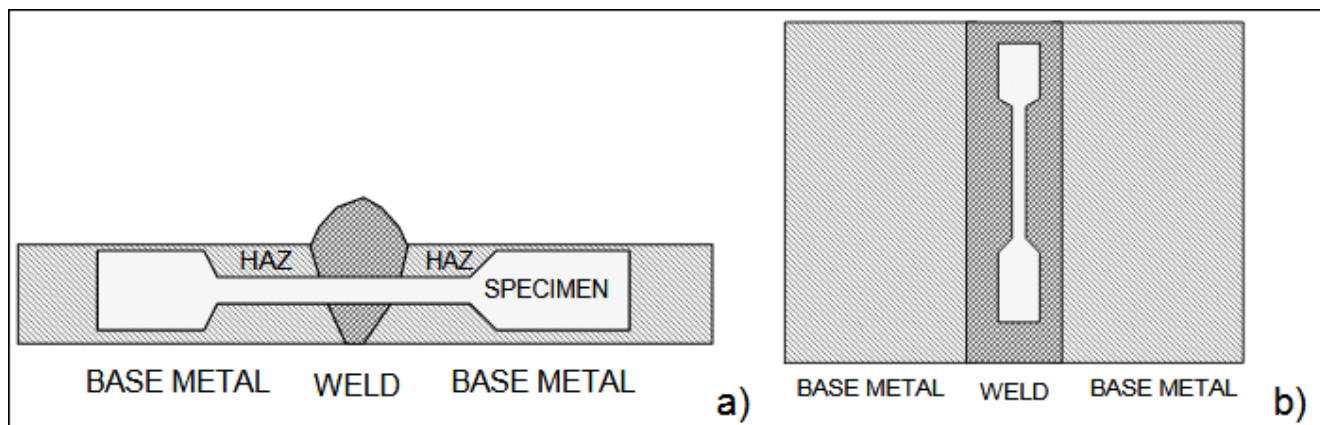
Schematic of tensile specimens from a) transverse section of weld joints and b) all weld specimen
